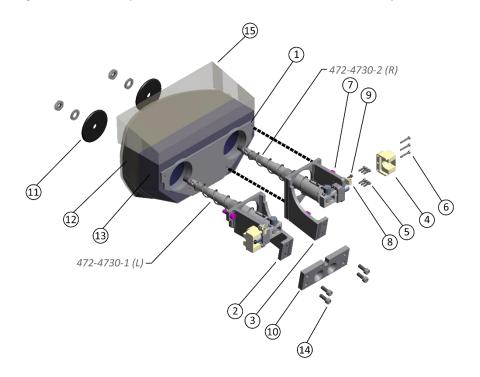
is an exploded view of the lower abdomen assembly, 472-4700.
